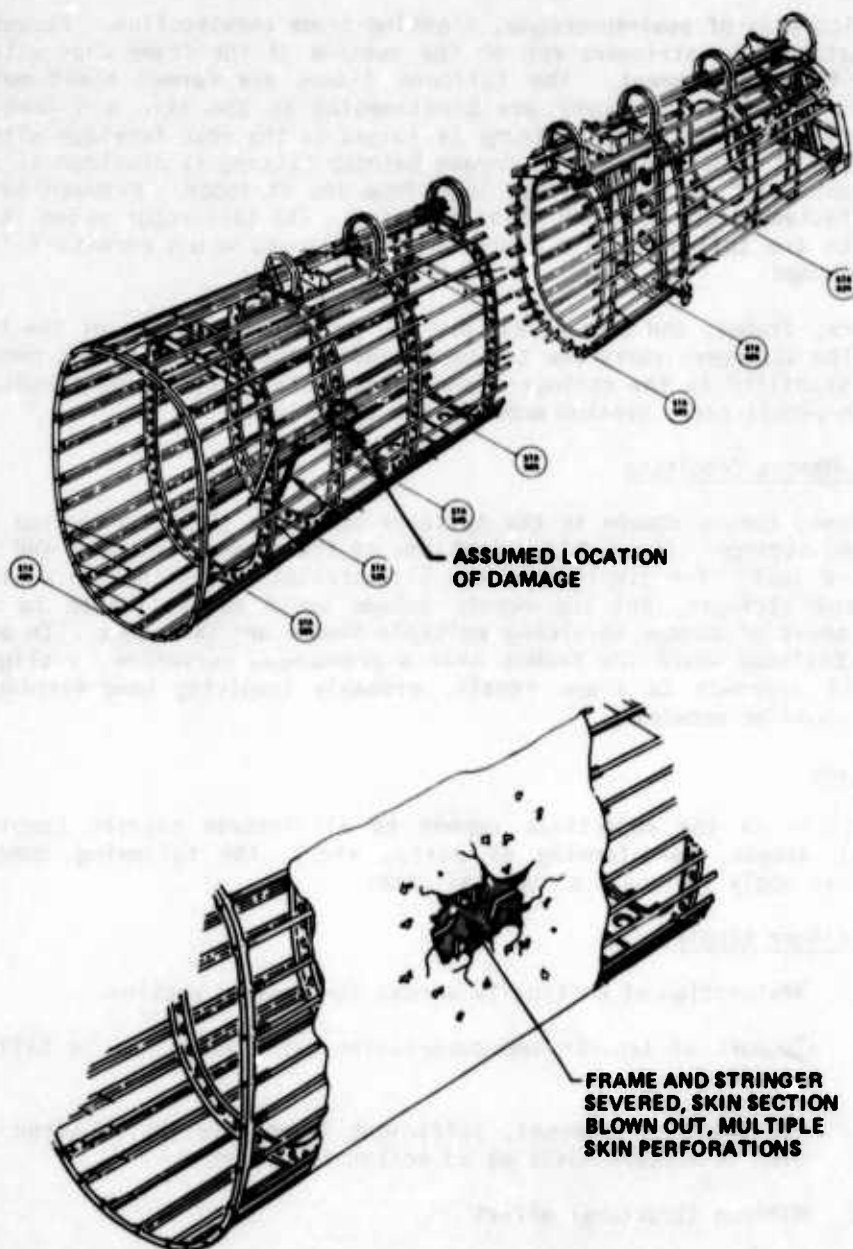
Tailcone Interim Repair Concept - Assumed Location of Damage to Skin, Frame, and Stringer
